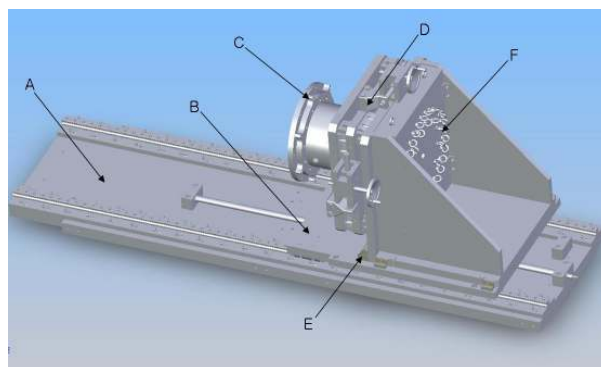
The installation tool for the in-pile plug assembly (A: Base Rail, B: Carriage C: Mounting Adapter, D: X-Y Table, E: Jacking Screw, F: Shielding Block)
